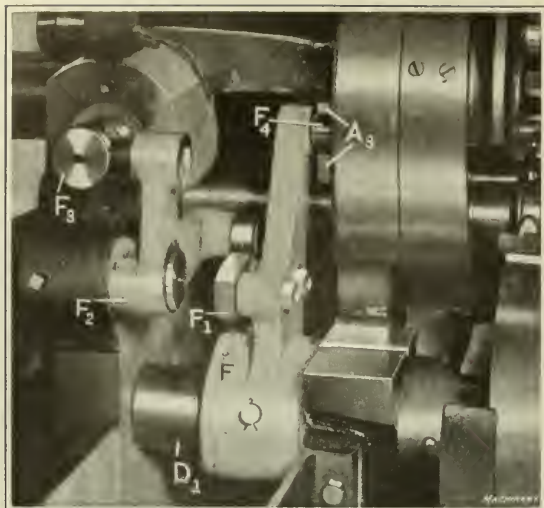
View showing Indexing Arm about to index Spindle Carrier with Locking Pin withdrawn
